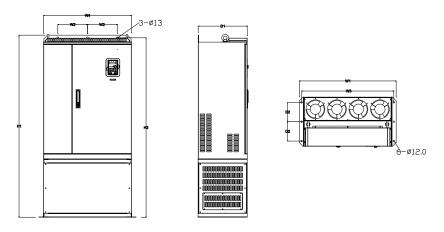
Floor installation of 380 V 220-315 kW VFDs
